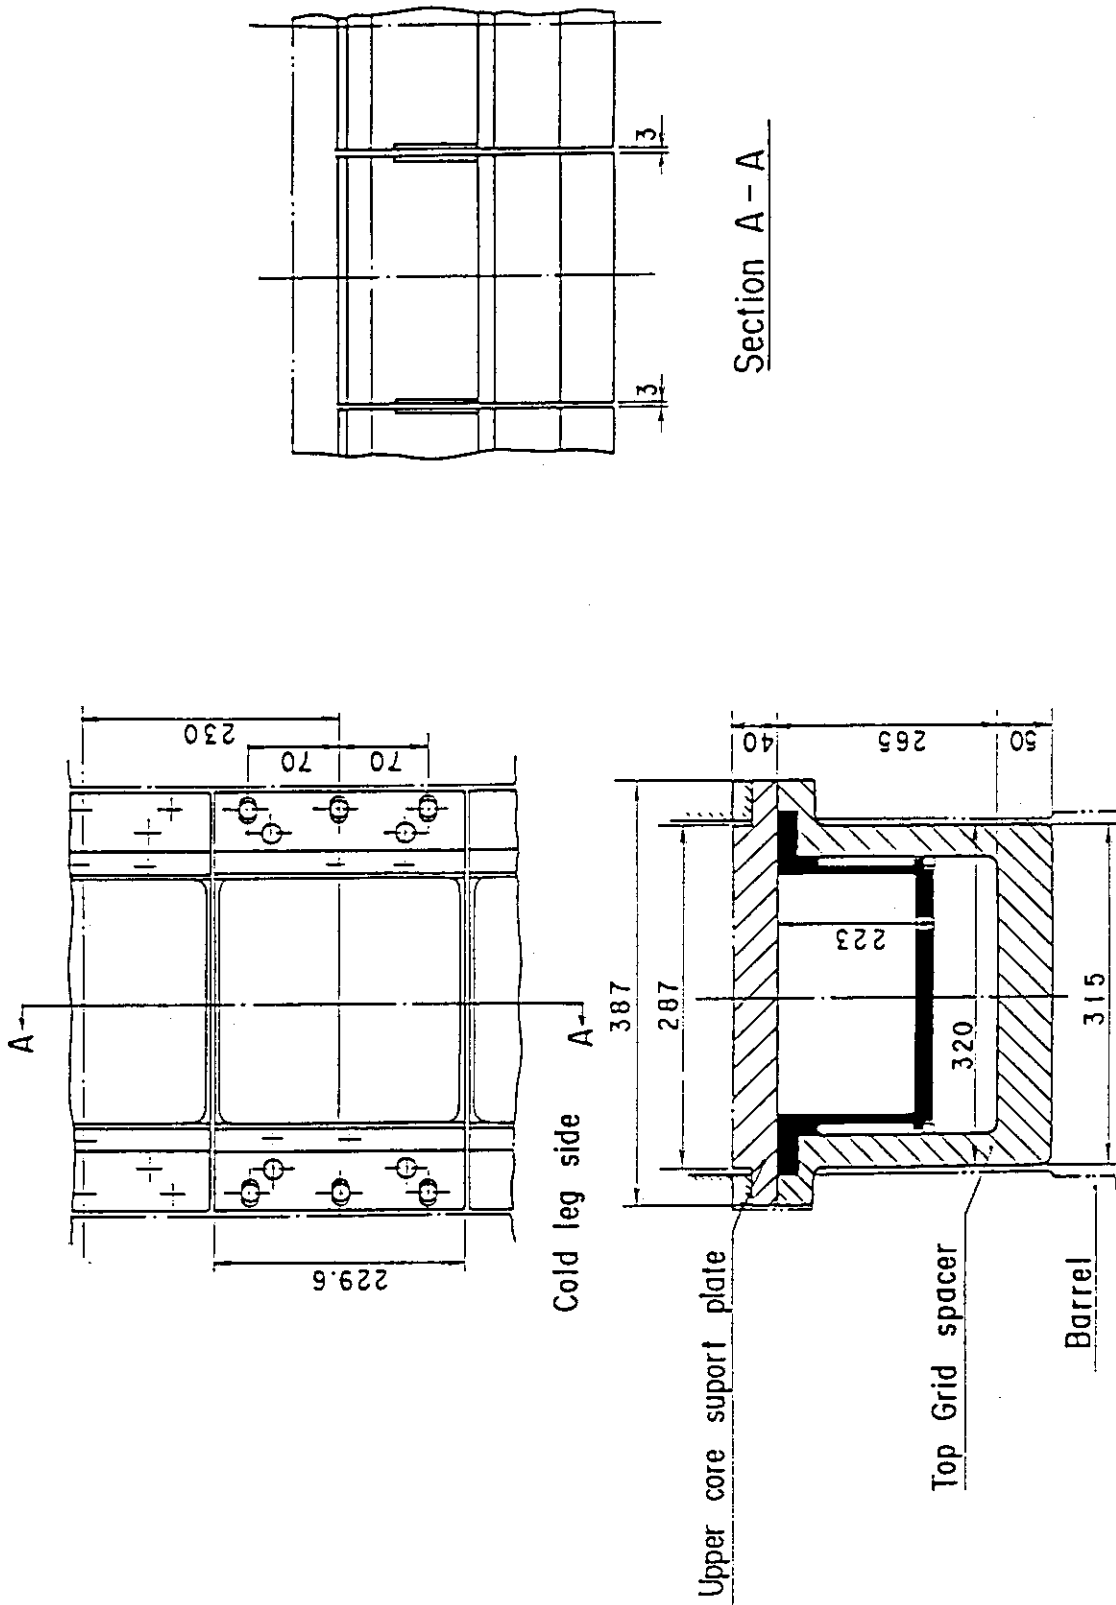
Arrangement and Principal Dimension of End Boxes and Top Grid Spacers
